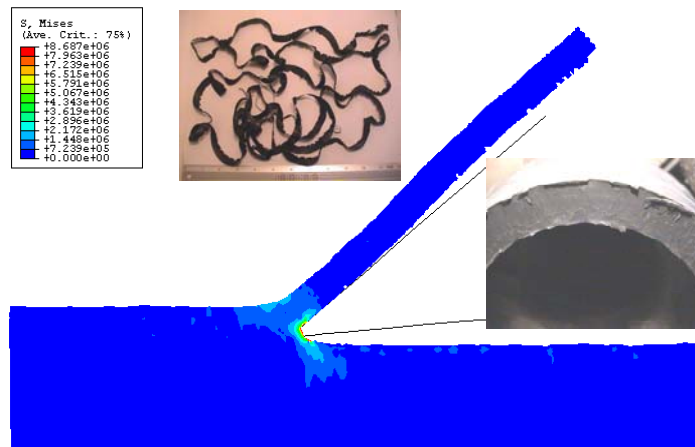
Continuous ribbon-like chips and smooth machined surface with a tool of 50° rake angle.
